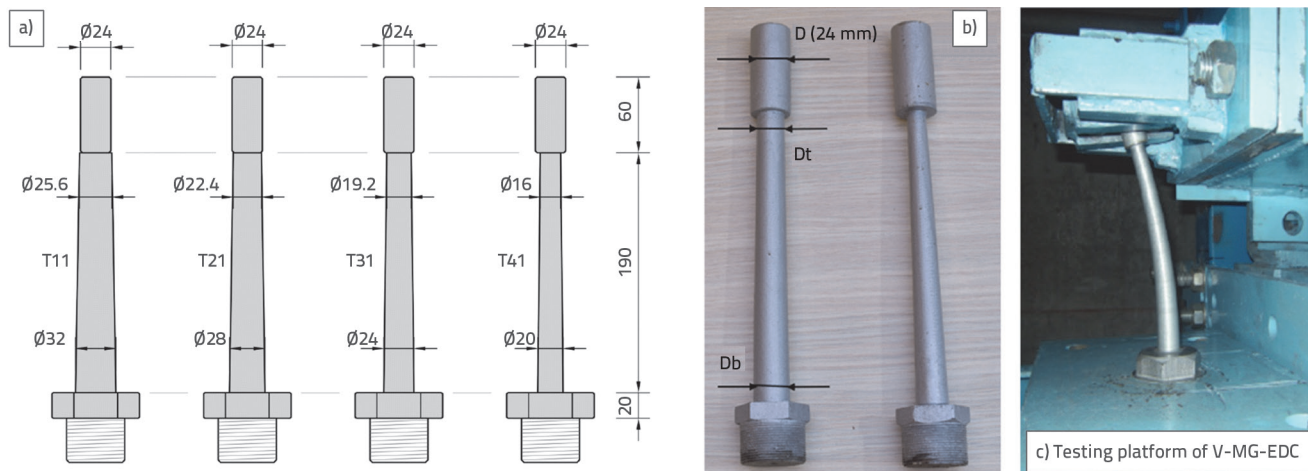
V-MG components: a) Geometry; b) Manufactured components; and c) Testing platform for components
